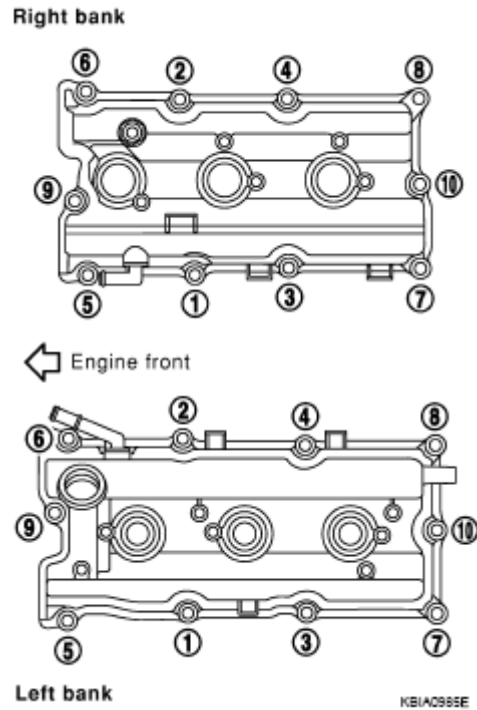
Identifying Rocker Cover Bolts Loosening Sequence
